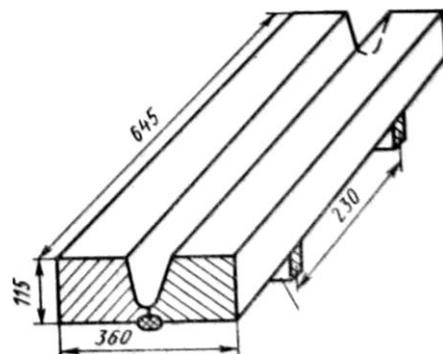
Type and dimensions of experimental plates for multi-pass automatic welding
